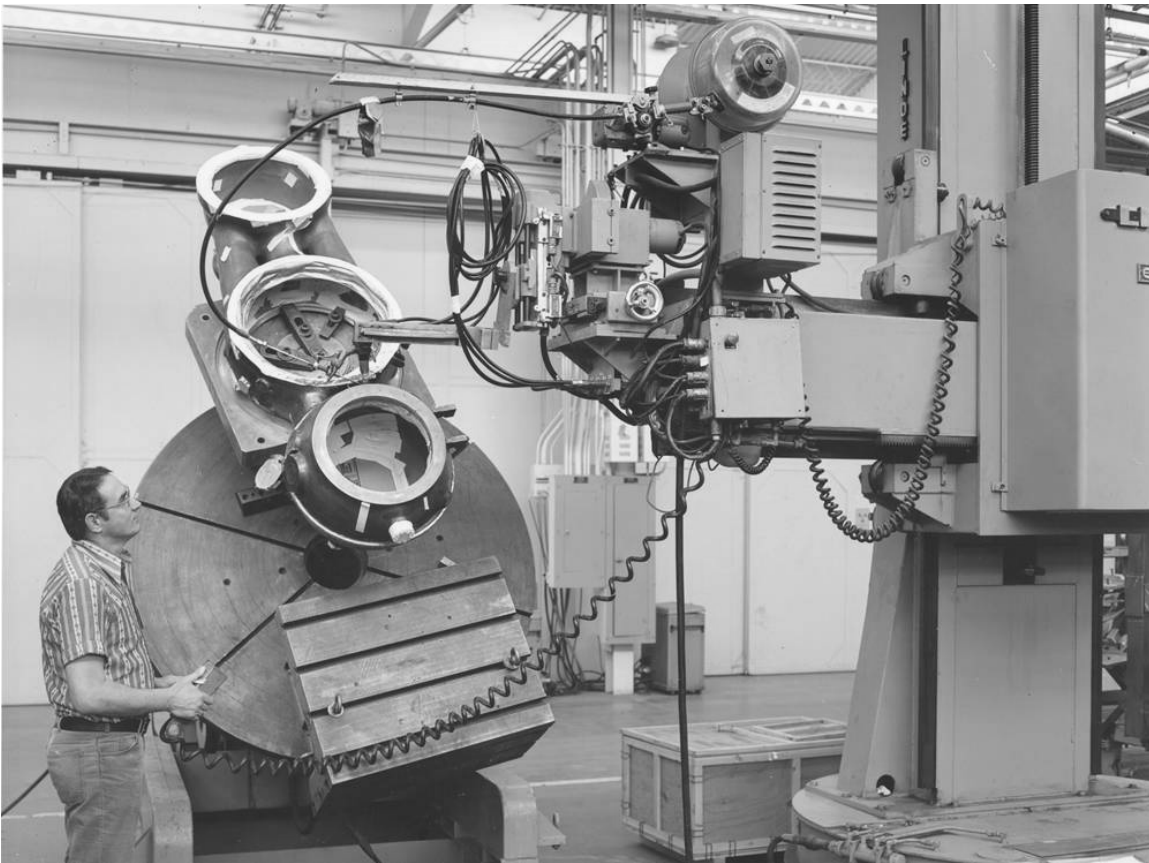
A Rocketdyne technician uses the Linde Automatic Welder to apply Weld Overlay Material on the Heat Exchanger to the Manifold Joint of the SSME 0001's Solid Wall Hot Gas Manifold (SWHGM), Canoga Park, 1974.
